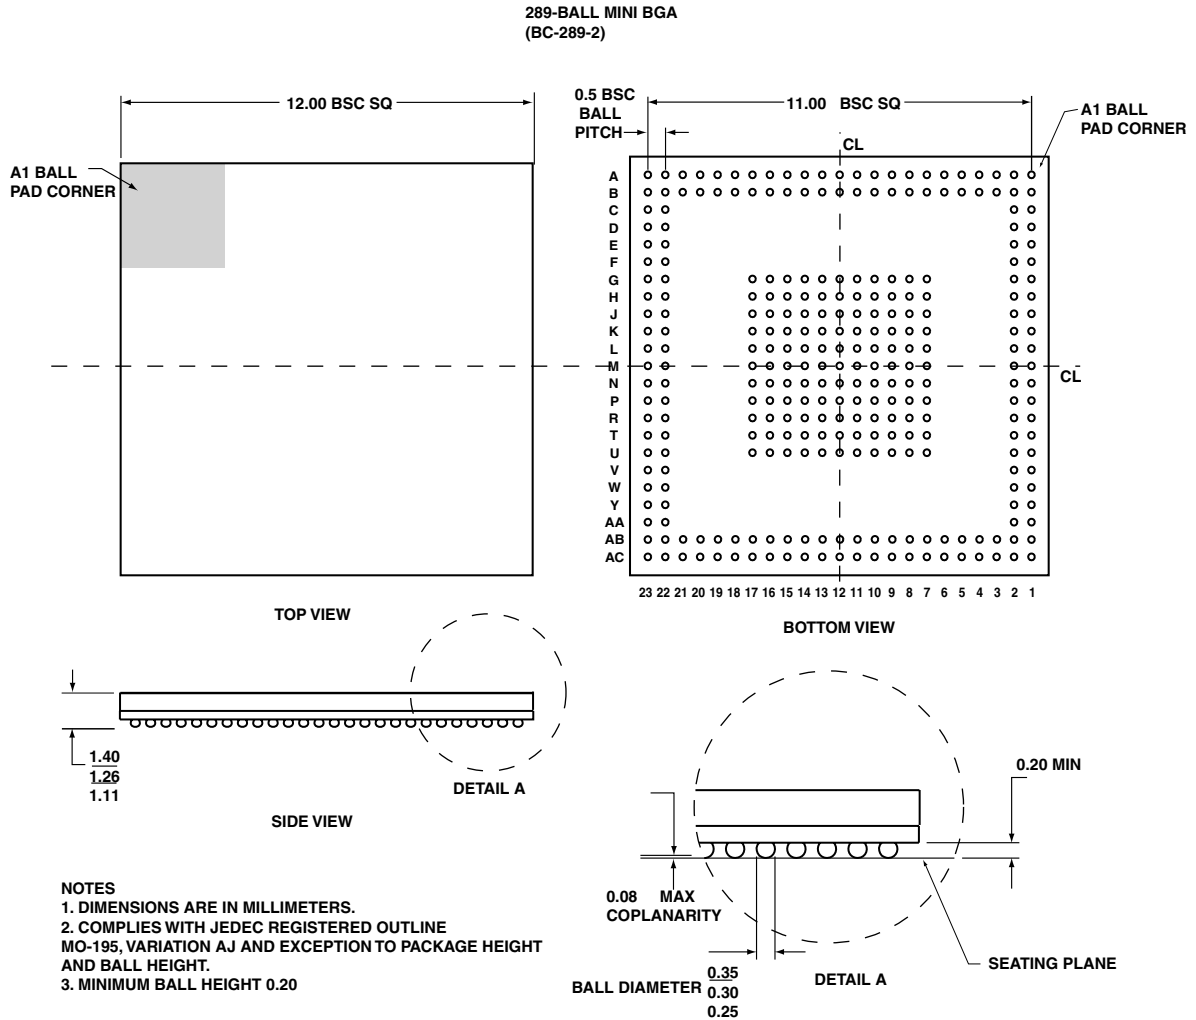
289-Ball Chip Scale Package Ball Grid Array (Mini-BGA)
